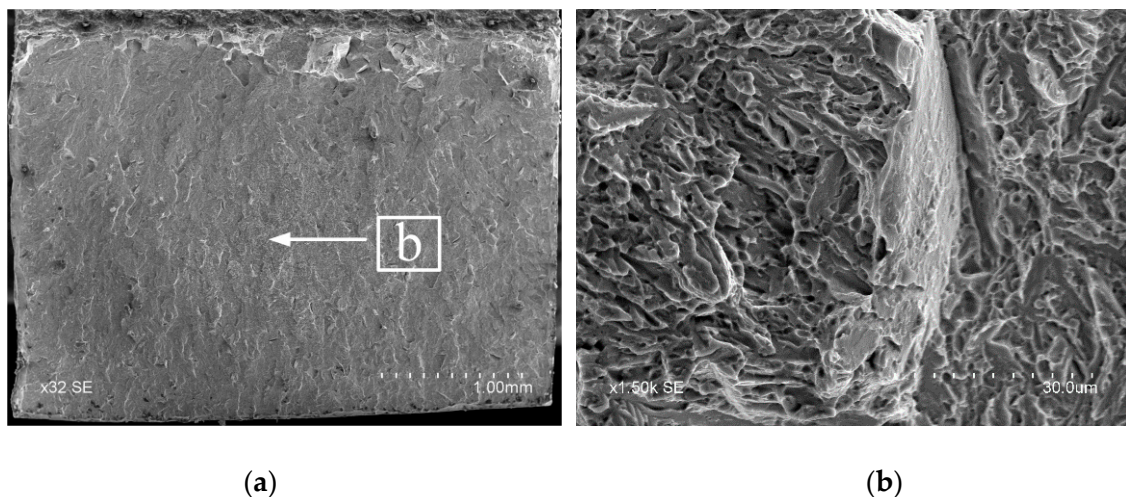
The fracture of the weld with preheating at 150 °C in plane fracture toughness test: (a) The overall morphology; (b) the enlargement of b.
